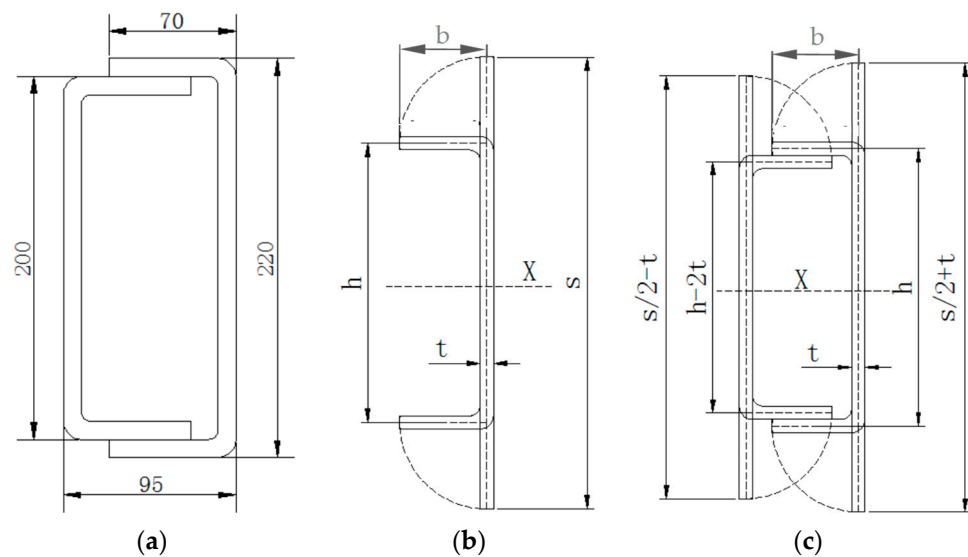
Longitudinal beam structure diagram. (a) Initial longitudinal beam section; (b) Slot cross-sectional drawing; (c) Stacked section diagram.
